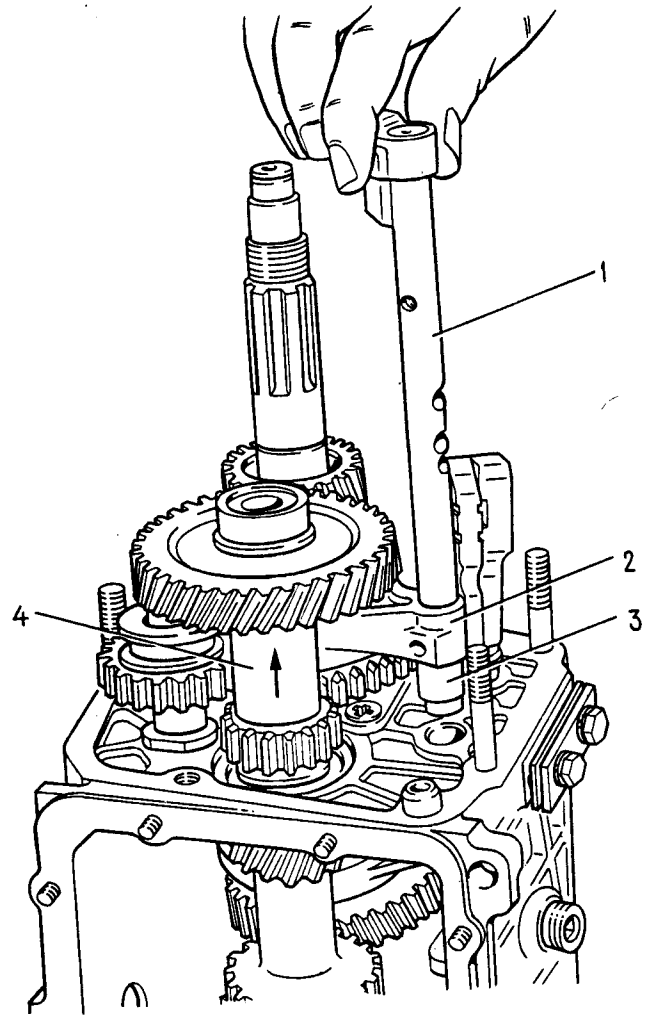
Removing 5th Speed and Reverse Shift Rail and Gear Cluster:
